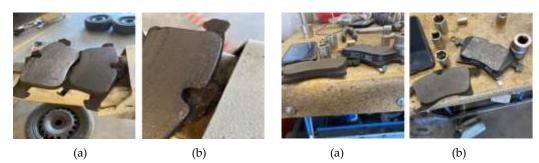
The degree of wear of the brake pads: -view of the right-left pads (a); enlarged view - right plate (b)
